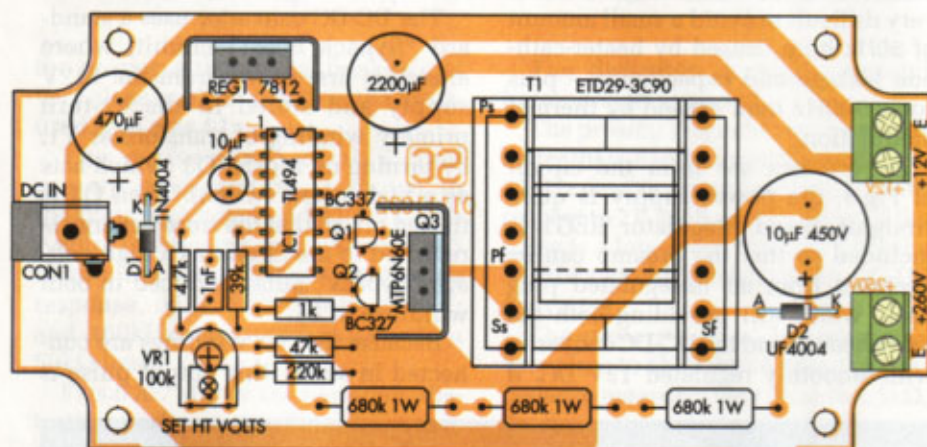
the component layout for the DC-DC converter board. Fit the flag heatsinks before installing REG1 and Mosfet Q3.
